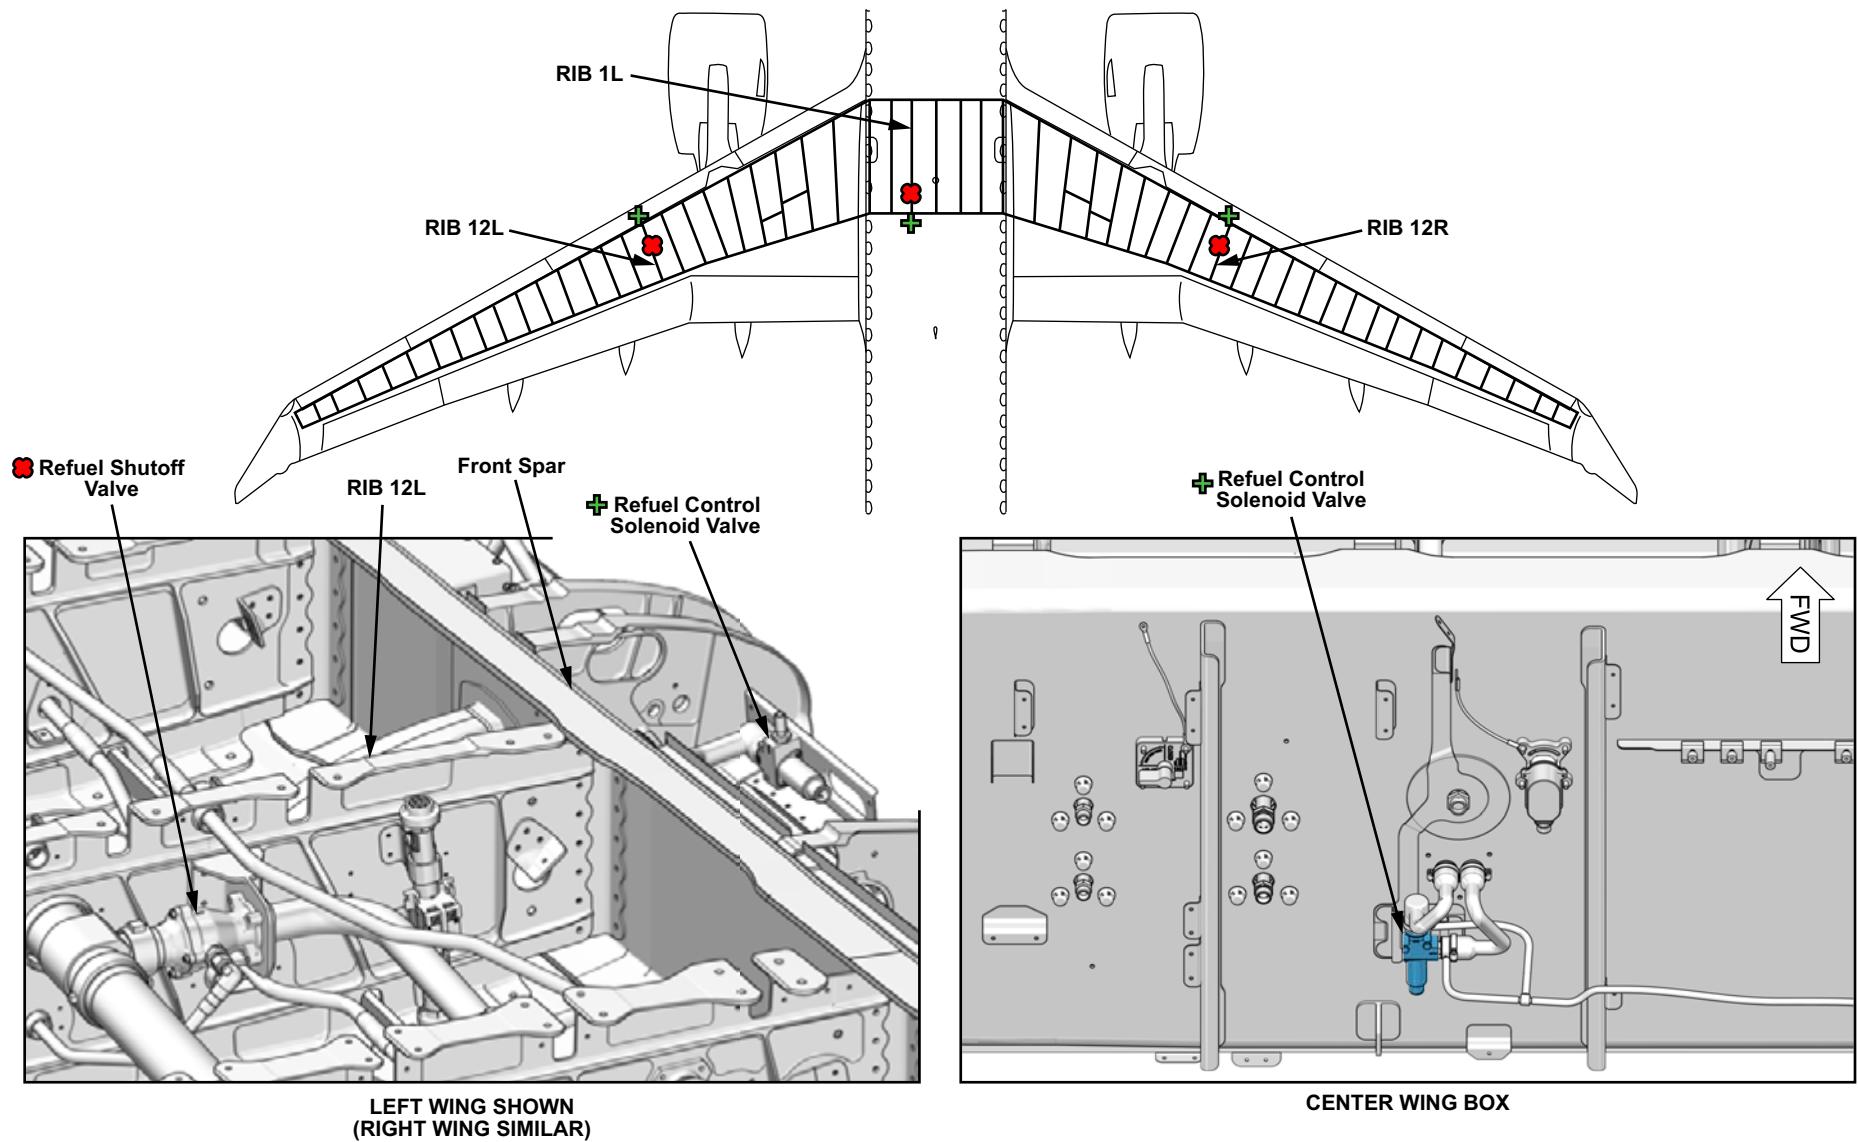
Refuel Control Solenoid Valve and Refuel Shutoff Valve Component Location
